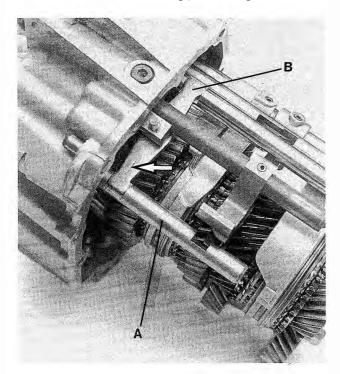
Shift operating shaft (A) and shift operating lever(B) correctly installed in transmission. Groove in lever should be up and facing left (arrow).
